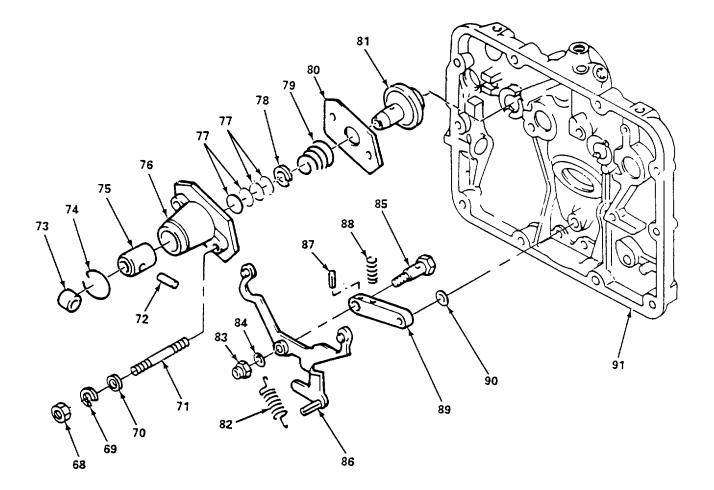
Injection Pump, Repair (Sheet 3 of 3).
